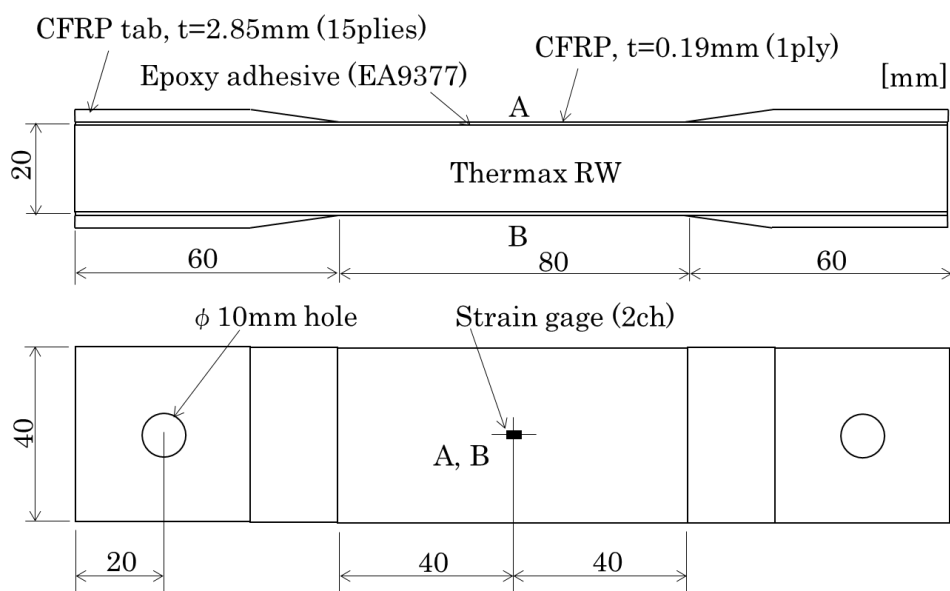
Dimensions of CFRP sandwich tensile test specimen
